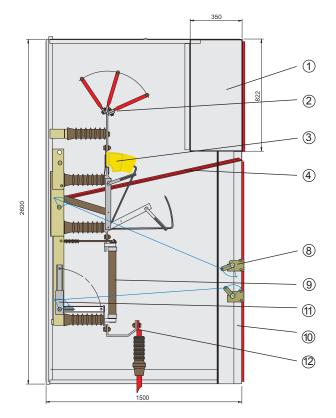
36 kV Transformer feeder panel with fuse-switch-disconnector H22 SEA
